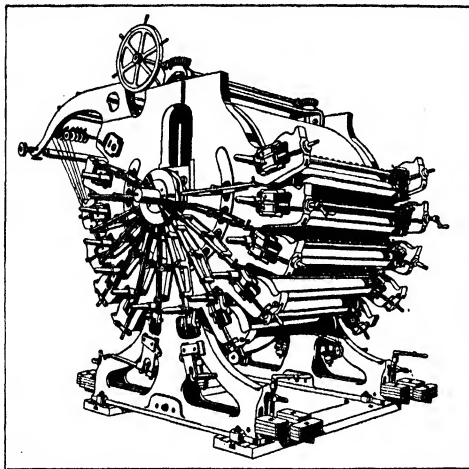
DIAGRAM SHOWING WORKING PARTS OF ONE COLOUR PRINTING MACHINE
